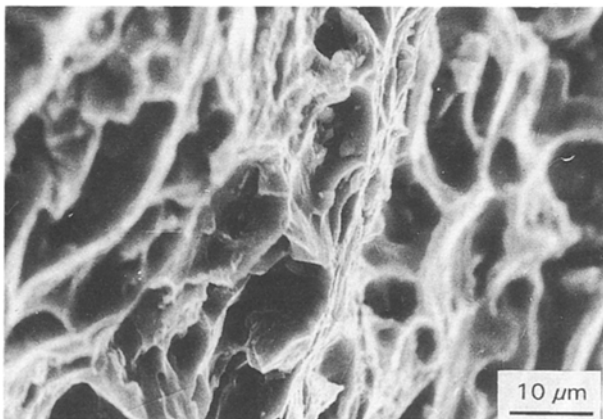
Scanning electron micrograph of tensile fracture surface of uncharged welds showing shallow dimples at the central portion of the weld.
